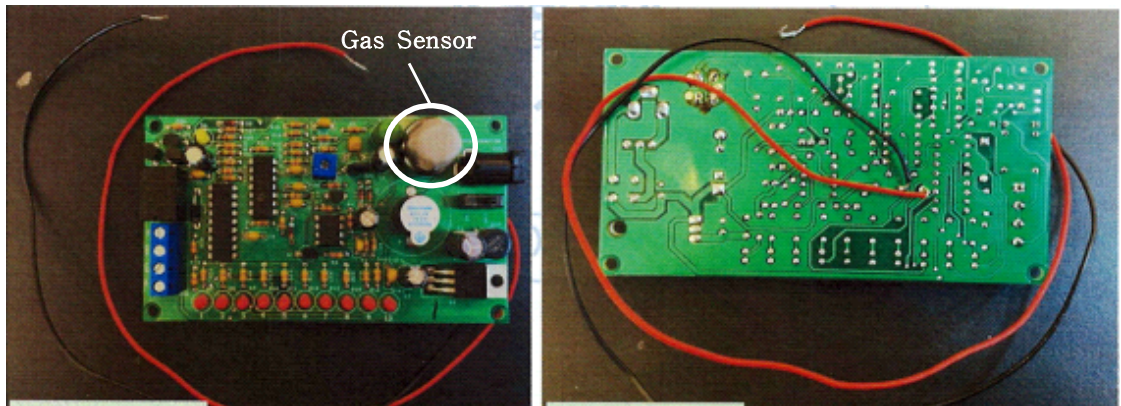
Photograph of Prototype environmental sensing module (Left: front, Right: back).
